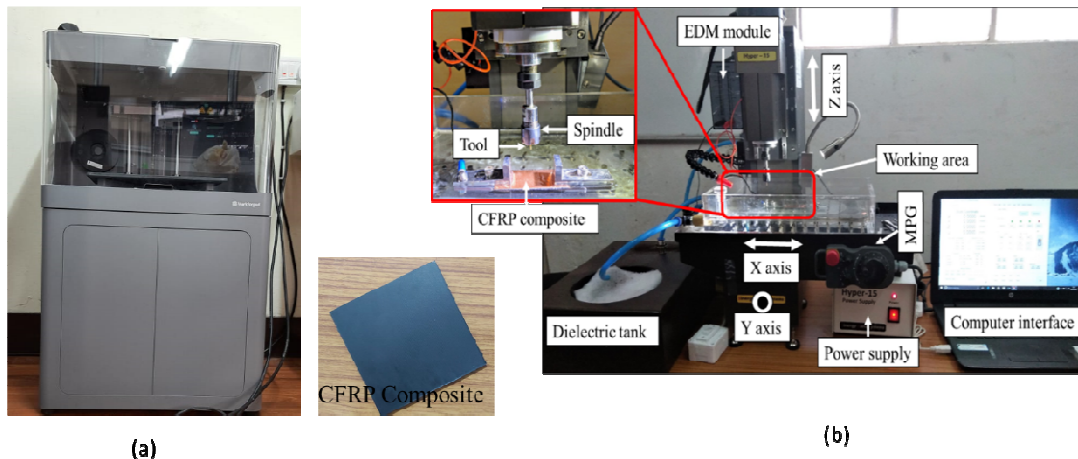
Experimental setup (a) 3D printer and (b) micro-machining centre
